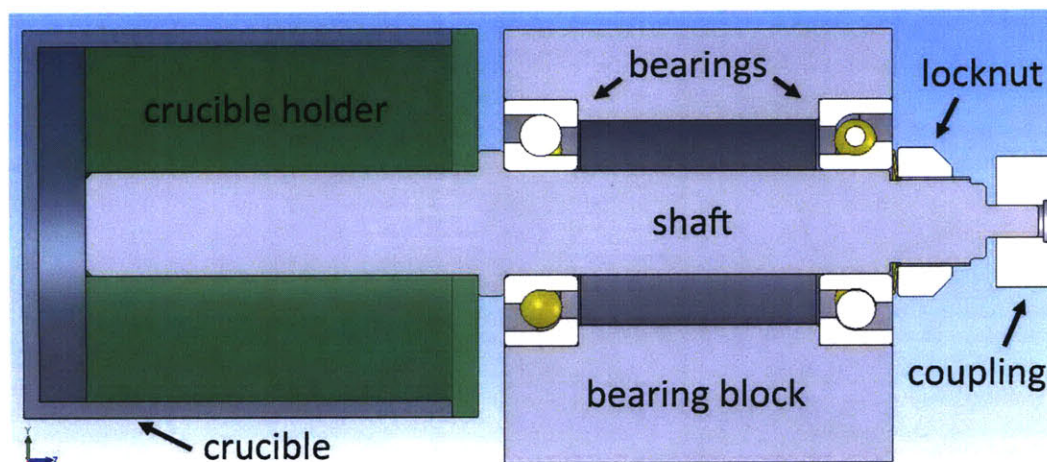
Cutaway schematic view of the spindle assembly. For scale, the shaft has a main diameter of 20 mm.
